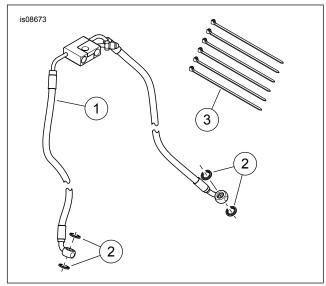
Service Parts: ABS Dual Disk Lower Brake Line
